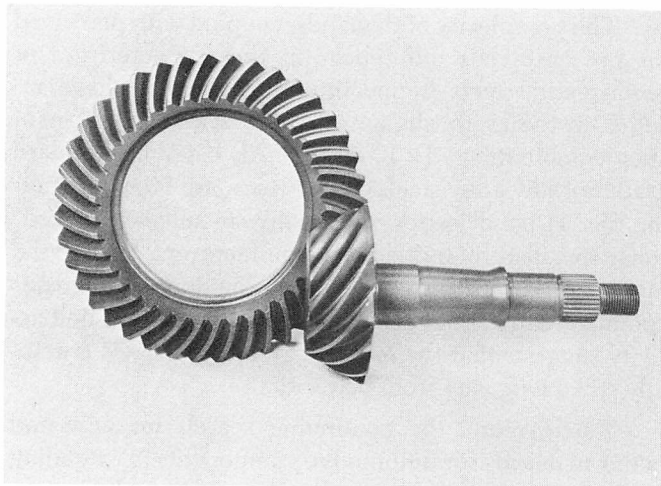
Nodular iron rear axle ring gear and drive pinion.
